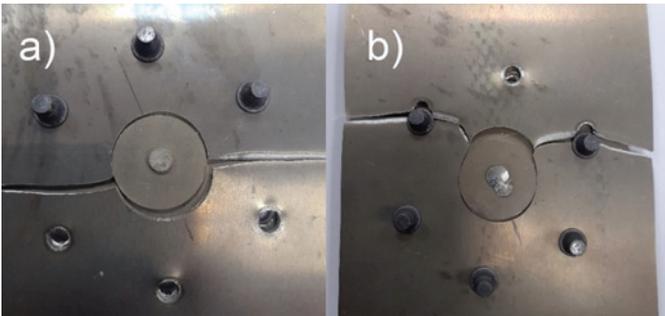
Fracture of the strapped specimen riveted with fasteners: (a) following fatigue test, (b) following static strain test
